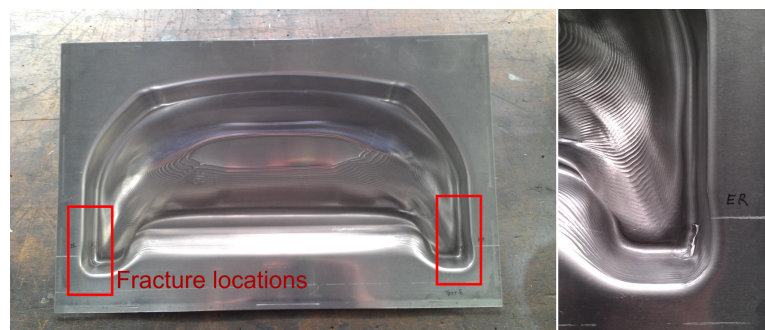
Left: Photograph of the component after two successful interim passes and 30% of the final pass, with fractures highlighted in red. Right: A close up of the fold-over failure.
